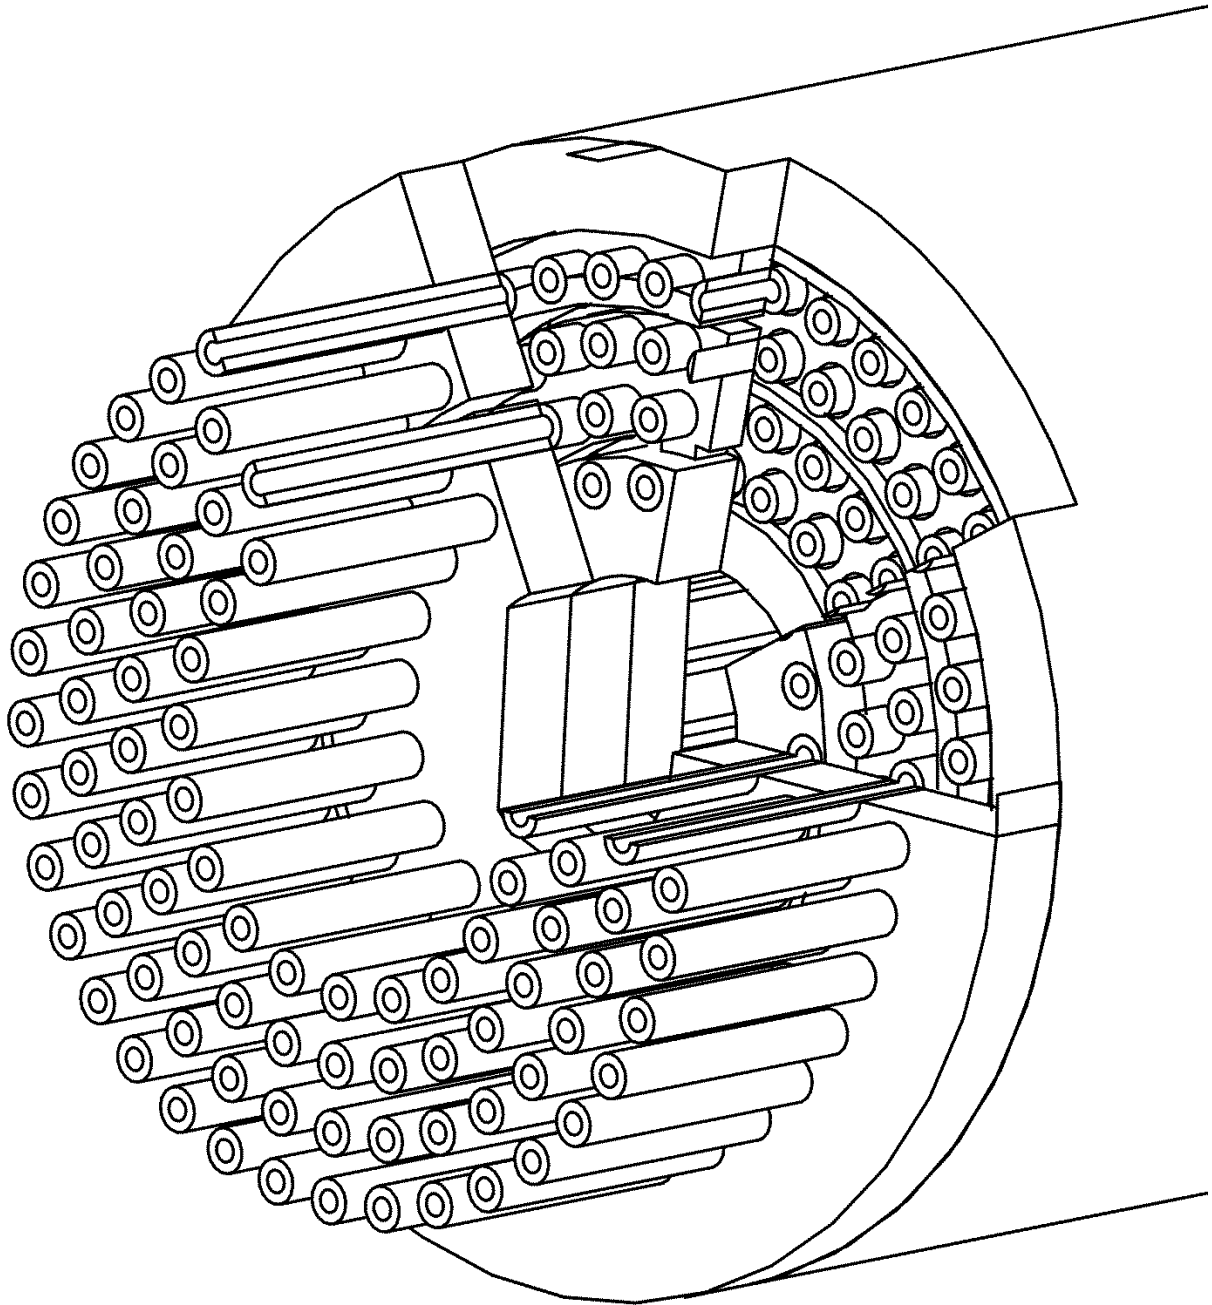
3D cut out view of the shell side distributor. The tube side distributor is removed.
